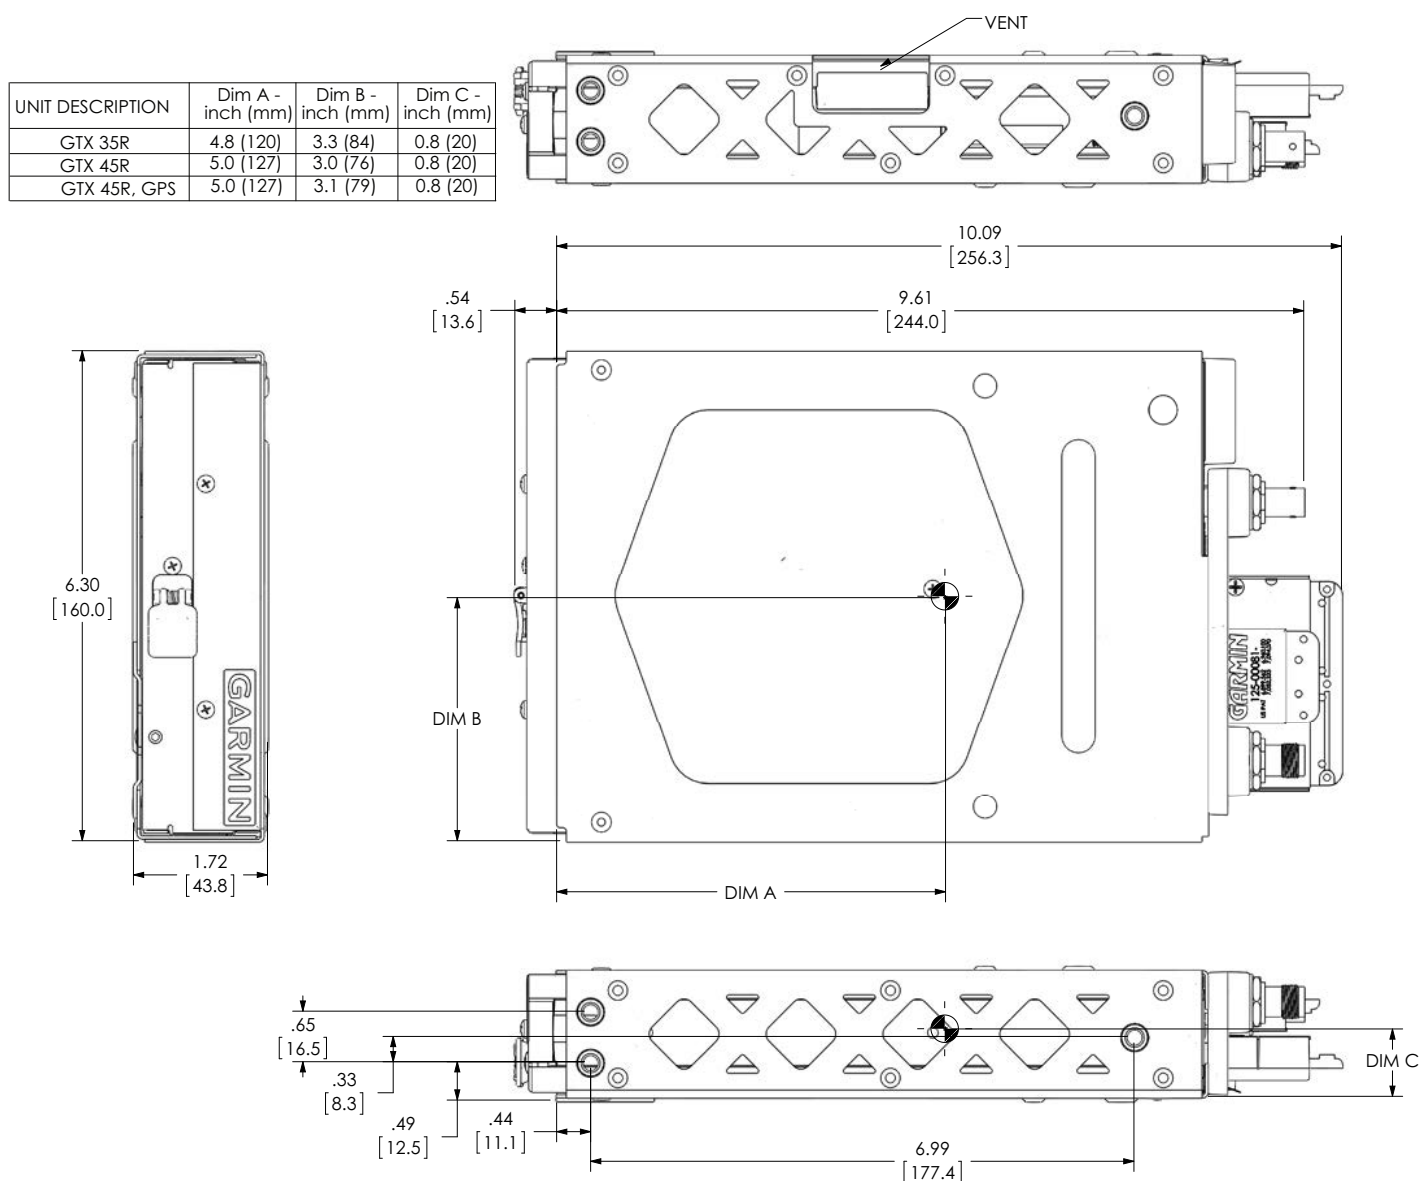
GTX 35R/45R Standard Remote Mount Dimensions and CG Shown
